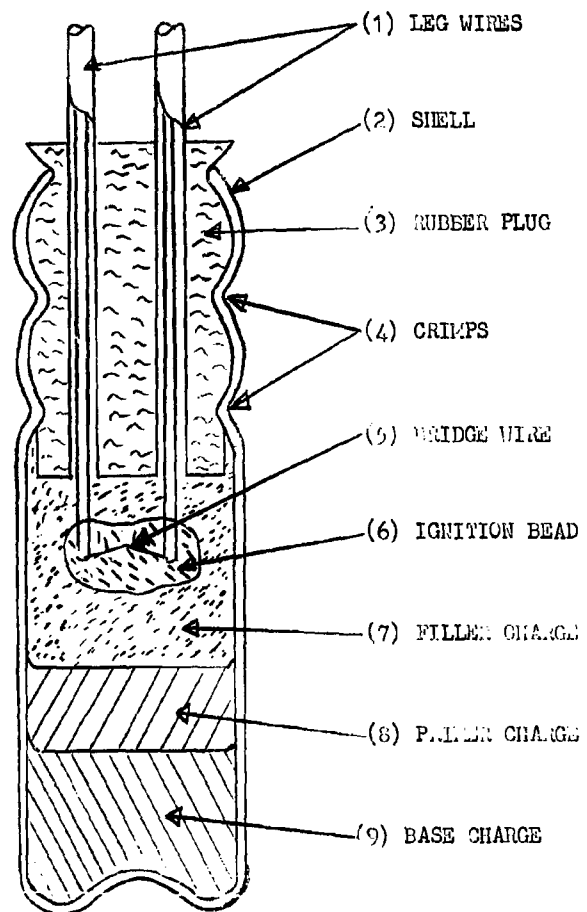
Cross-Section Drawing of Blasting Cap.
